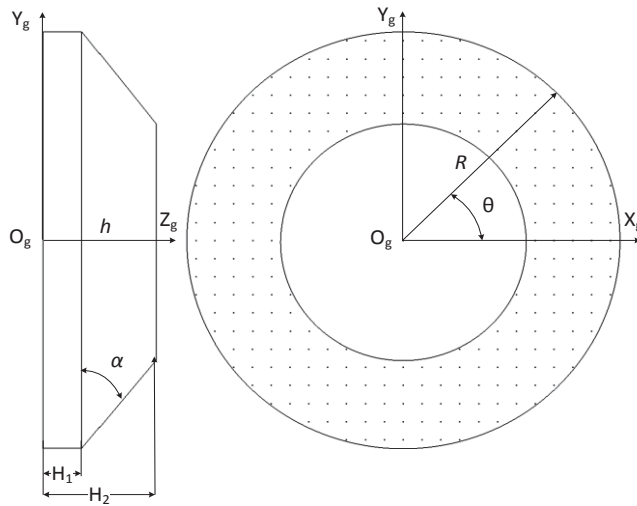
Illustration of the dimensions of the standard grinding wheel selected in this work and the wheel coordinate system.
